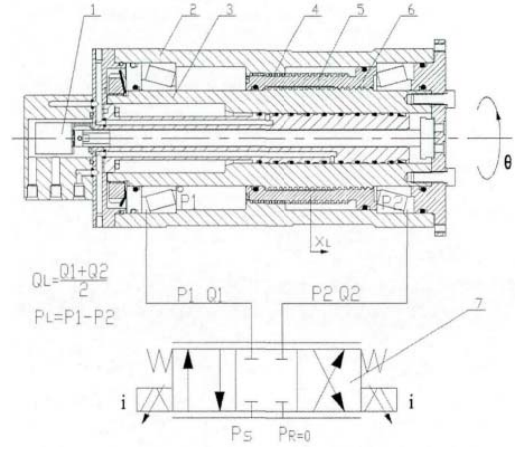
Valve controlled swing cylinder (elbow of hydraulic manipulator)
